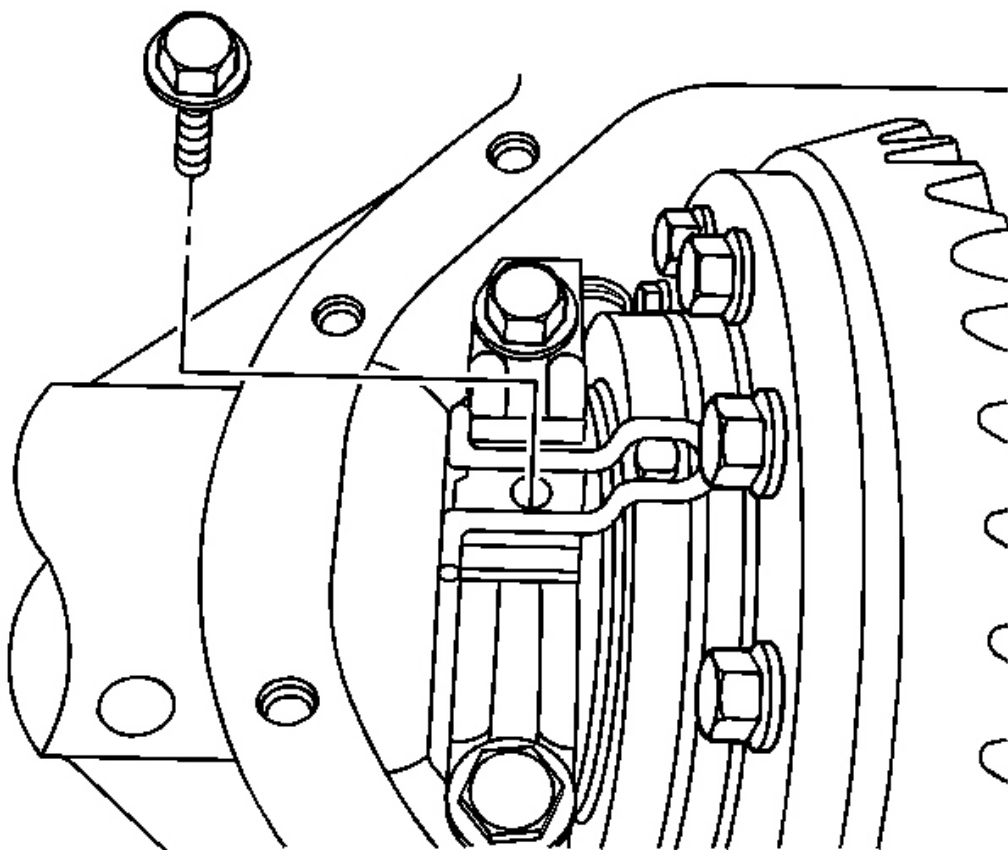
Locking Differential Coil Assembly Lock Bolt
